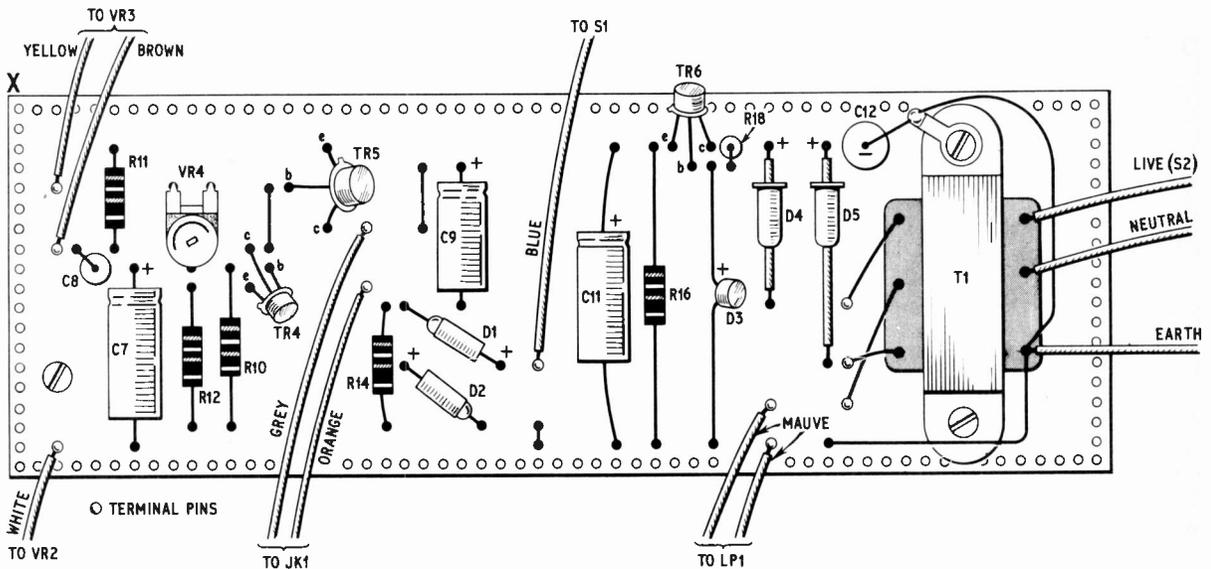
Assembly and wiring details of pen amplifier. Cut copper strip at following holes: B48; C36; C48; D27; D48; E10; E11; E48; K27; M6; N6; N30; O6; O48; P6; P48; Q48; R9; R48
